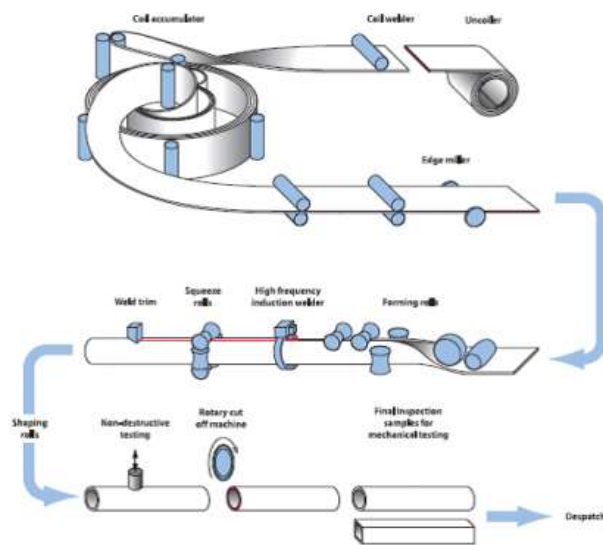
Example of roll layout (SteelConstruction.info, n.d.)
